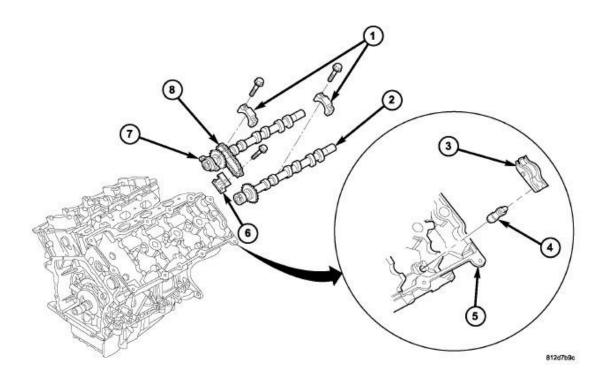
Camshaft Bearing Cap Removal Courtesy of CHRYSLER LLC
